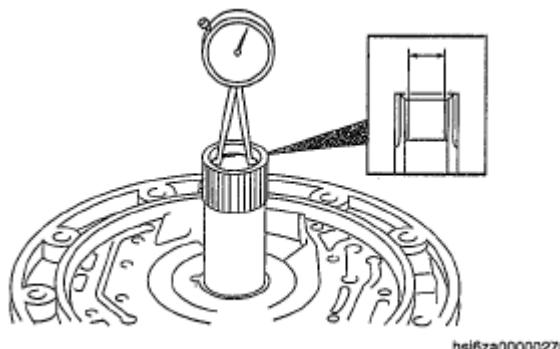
Measuring Inner Diameter Of Oil Pump Shaft Bushings Using Dial Gauge
